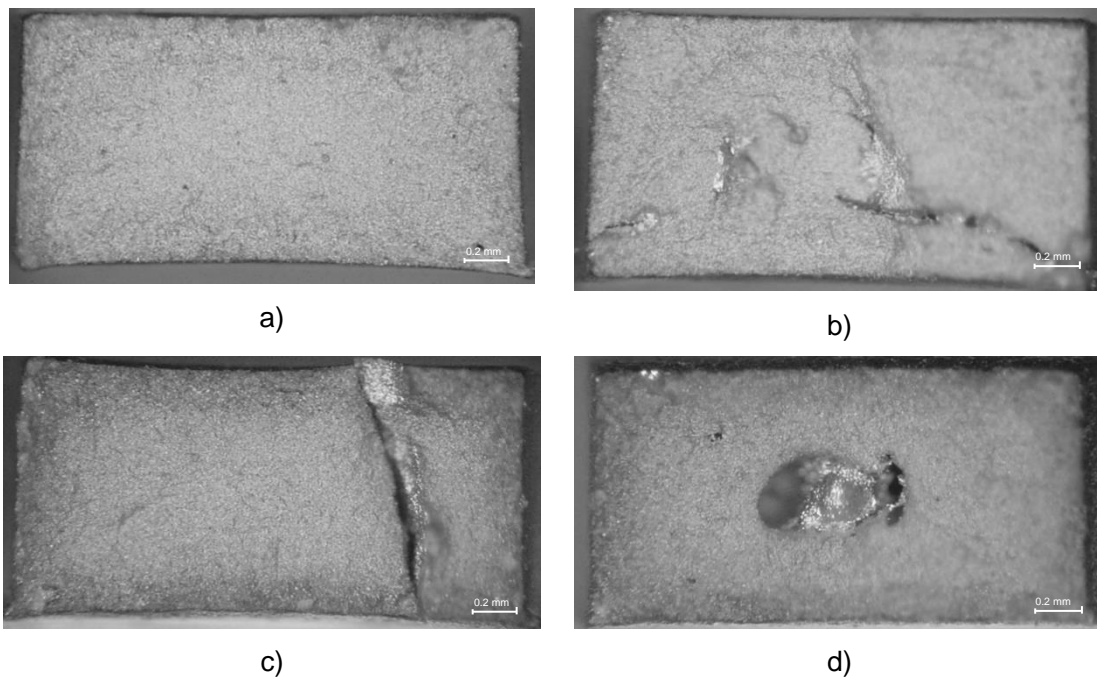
Fracture surface of sintered a) without defect, b), c) and d) with defect
